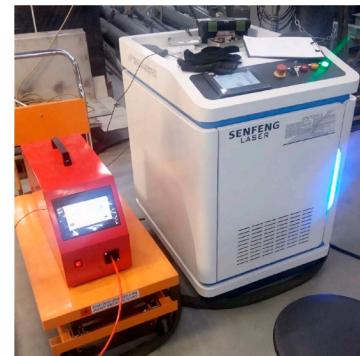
General view of the laser welding system manufactured by SENFENG (PRC) model SF 1500 HWM
